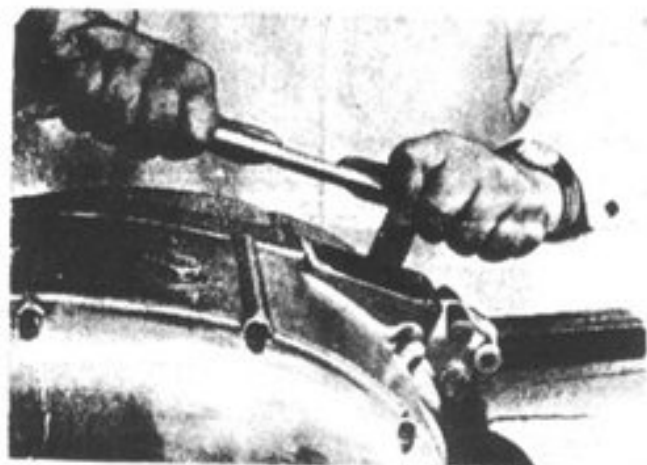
Unscrewing the outboard flywheel fastening screw, HЖ-Ю-3 motorcycle.
